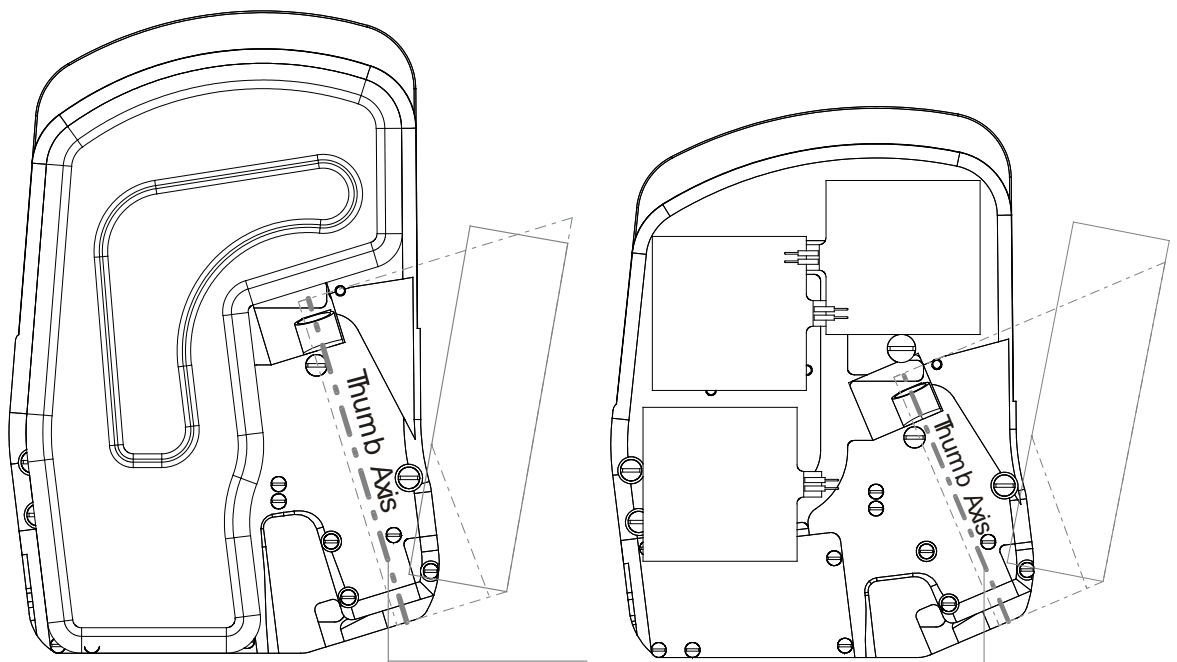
Maxon and Mini Motor Configurations of Thumb Axis in Palm Assembly
